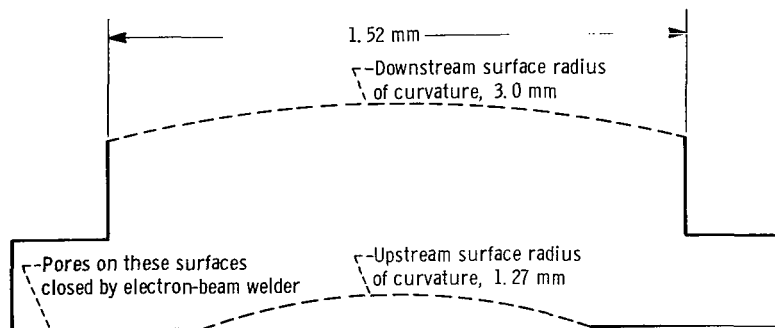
Cross section of porous tungsten ionizer showing surfaces that have been closed with electron-beam welder.
